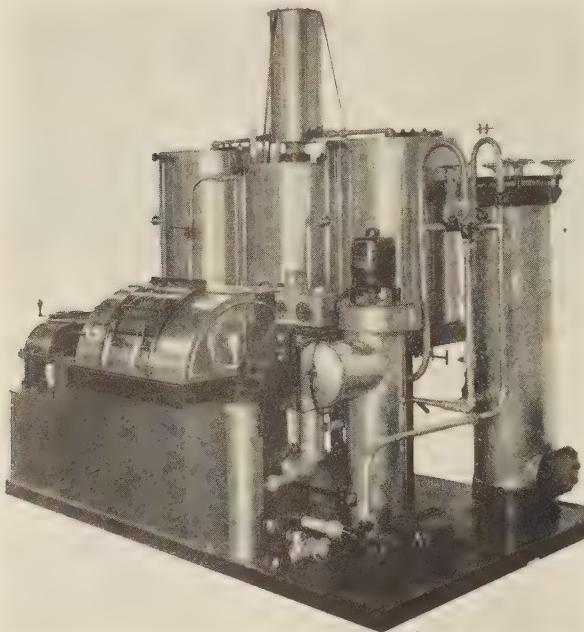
DRY-CLEANING UNIT FABRICATED BY WELDING VARIOUS GAGES OF MONEL
